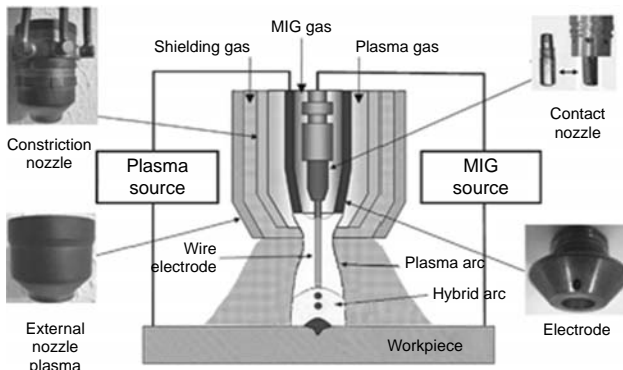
Schematic design of a torch for plasma–MIG welding highlighting the main components (adapted from Oliveira⁵).
